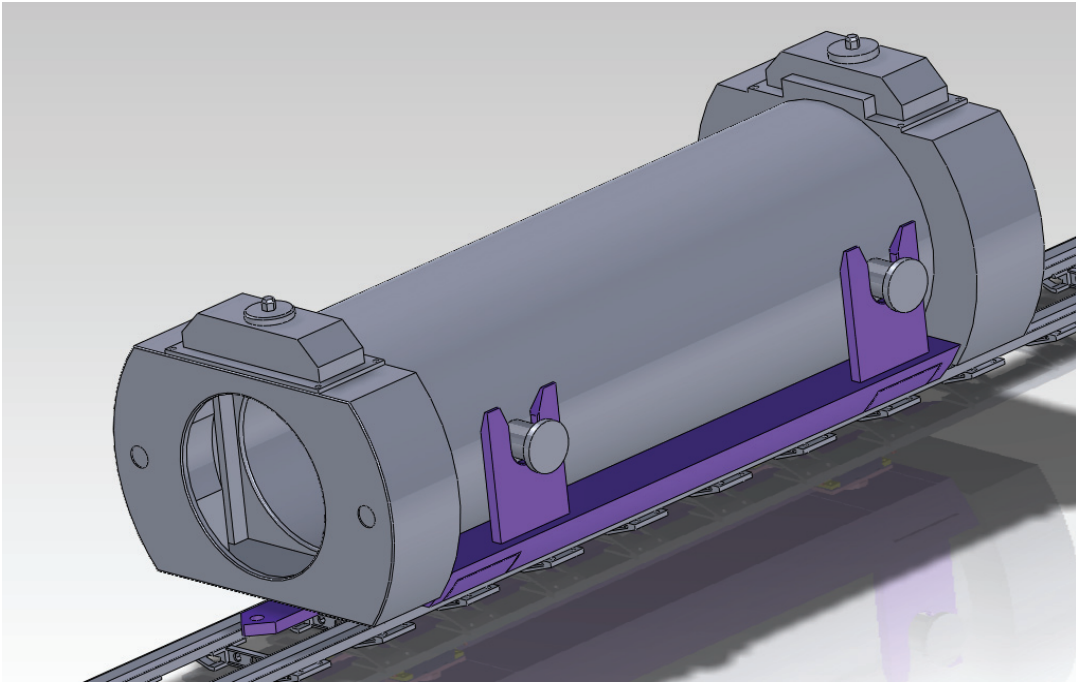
Container Transfer Cask on transport trolley, with shielding doors in the open position.
